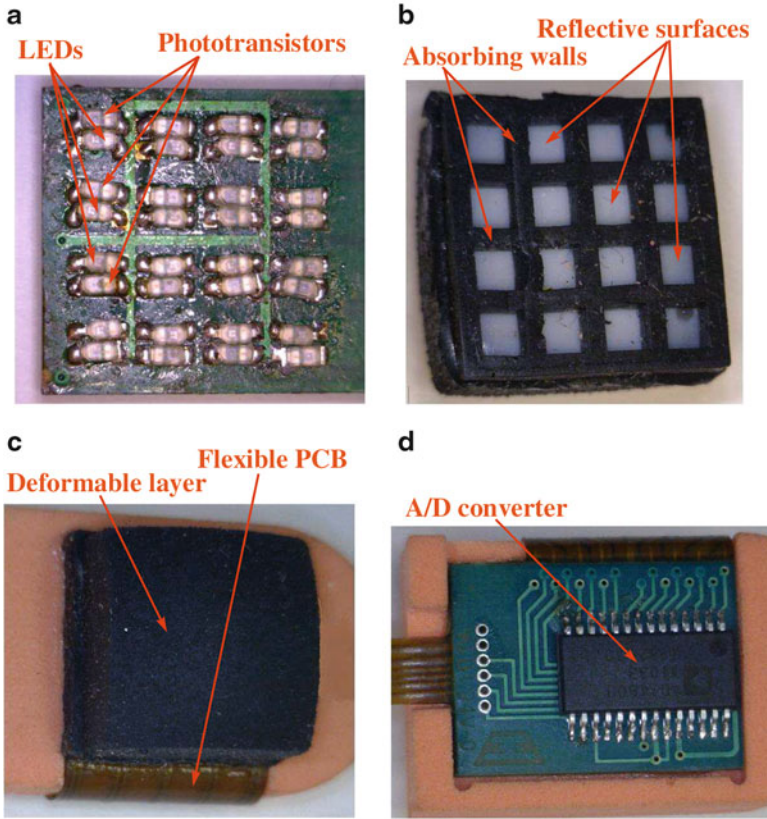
Pictures of the tactile sensor: (a) electronic layer, (b) bottom view of deformable layer, (c) top view of assembled sensor, (d) bottom view of assembled sensor
